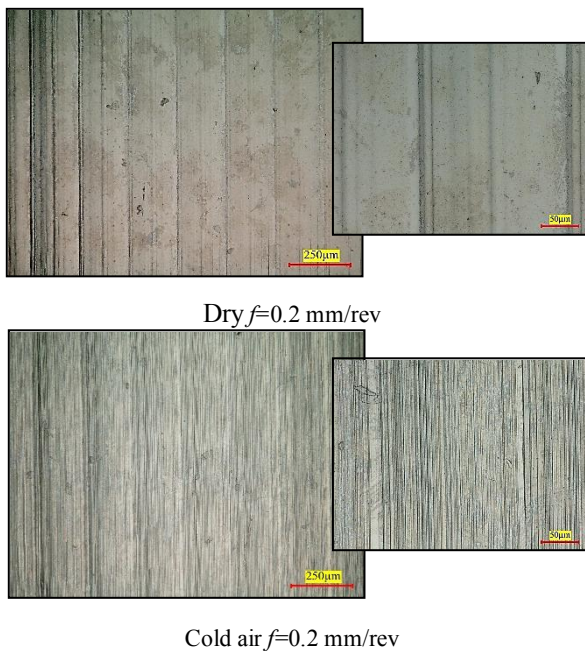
Surface topography of finish-machined SLMed Inconel 718
